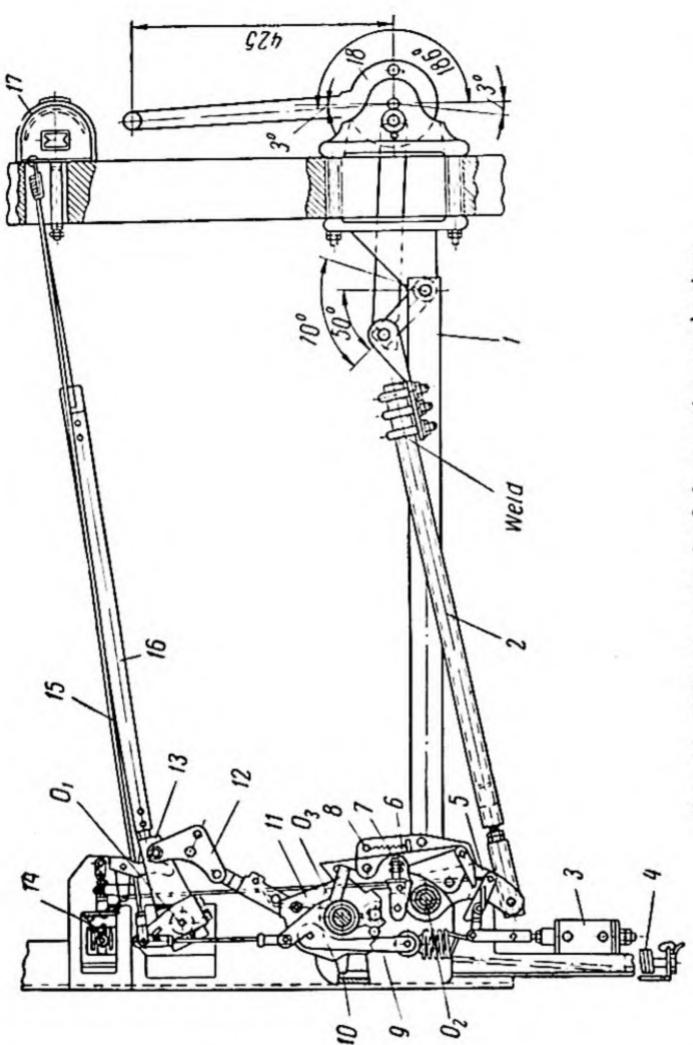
IIIP-21 spring-loaded operating mechanism:
